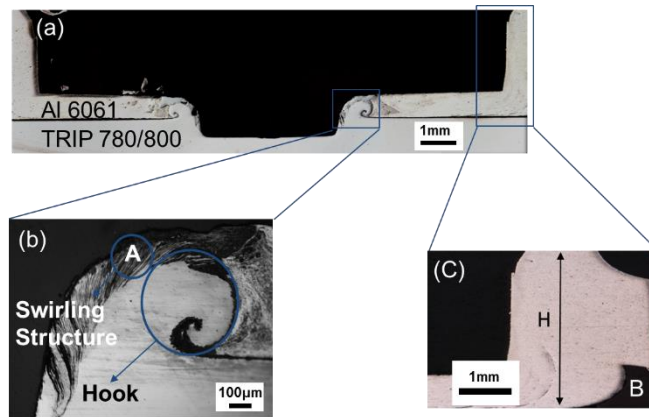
(a) Cross section view of the weld nugget (b) Geometry of the hook (c) Detailed view of the right end side of welding zone (Plunge speed 10 mm/min, dwell time 5 s)
